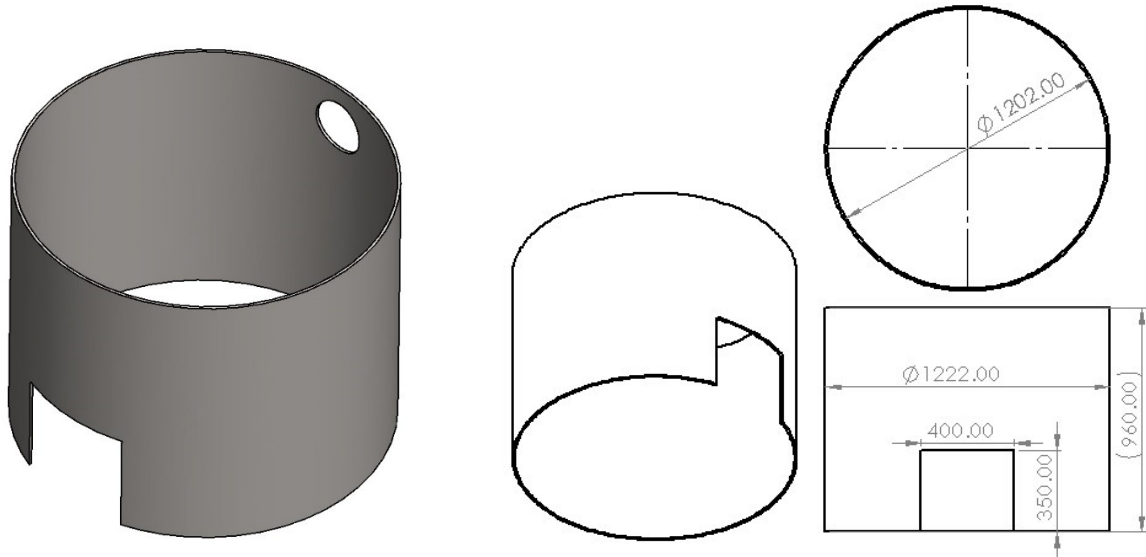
Outer Sheet Metal with its dimensions of Cylindrical Cook-Stove Model.
